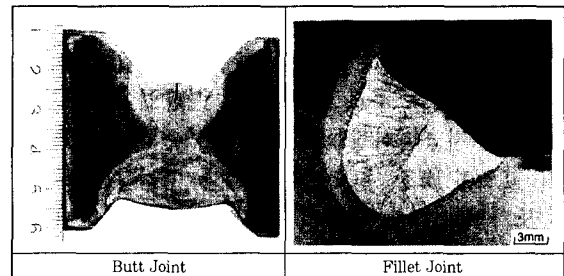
Examples of hot cracking in butt and fillet welded joint
